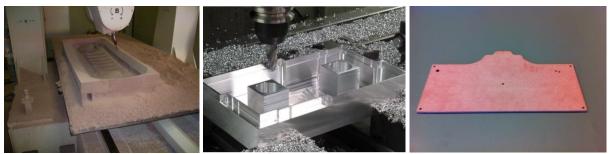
A wooden mould (Van Leeuwen Modelmakerij, n.d.), Figure 30b: An aluminium mould (Machinefabriek De Wilde, 2011) & Figure 30c: A mould of synthetic resin (Schreinemacher Kunststoffen B.V., 2014)
